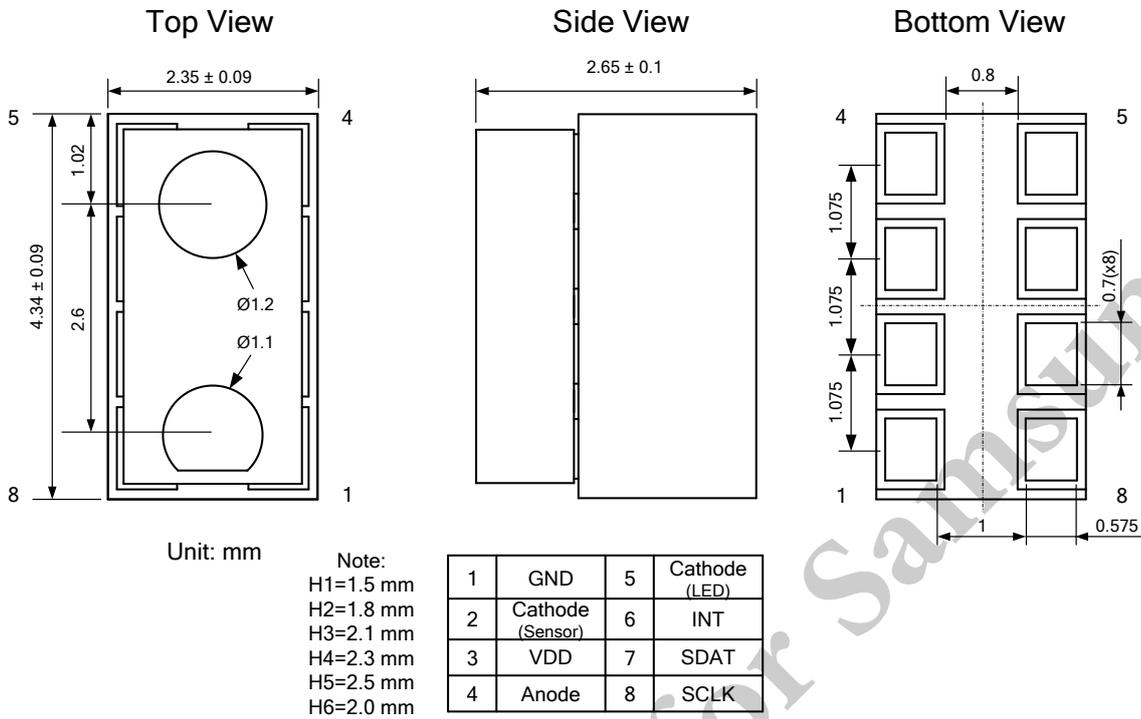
CM36652M3OE-H1 Package Dimensions
